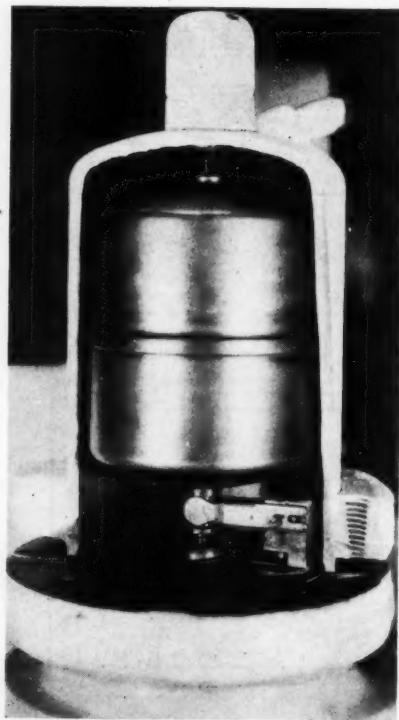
Cutaway view of float valve used on DR-2 unit.
